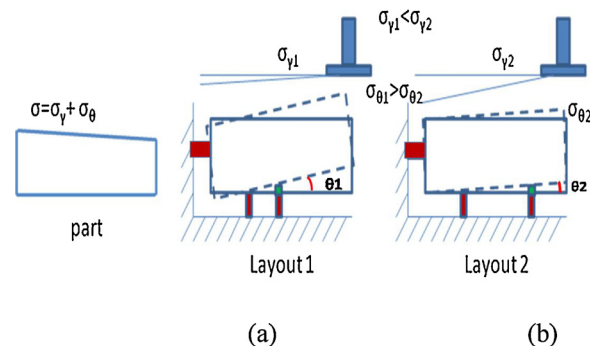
Impact of fixture layout on tolerance allocation for a machine tool.
